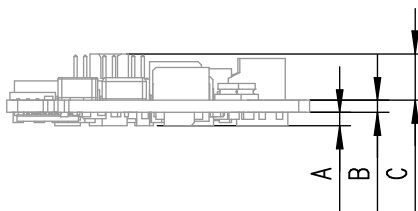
Mechanical Dimensions ETK-S4.2A: Microcontroller with Socket Adapter mounted
